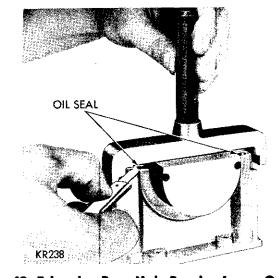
Trimming Rear Main Bearing Lower Oil Seal sible. These side seals are made from a material that expands quickly when oiled.
